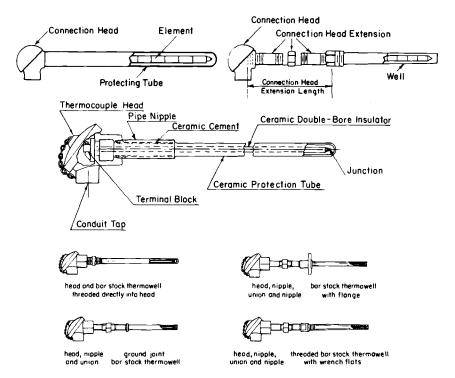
Typical examples of thermocouple assemblies with protecting tubes.
